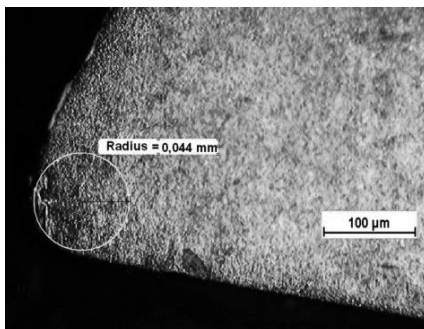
Inscribed circle in the tool tip - magnified 100x, blade with welded cutting wedge.
